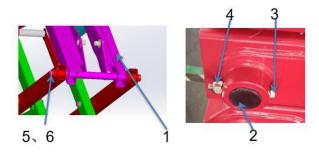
Installation of fifth layer fork 1. Fifth inner arm assembly 2. Pin 3. Bolt 4. Nut
